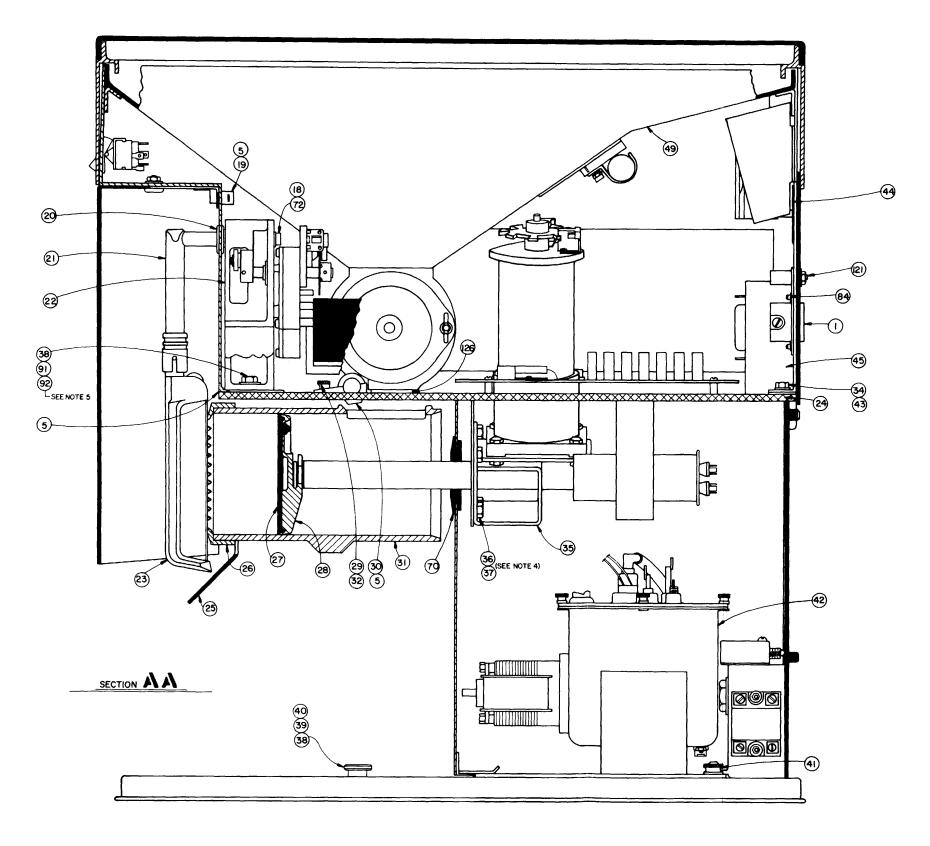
C MODEL 550A ASSEMBLY DRAWING
